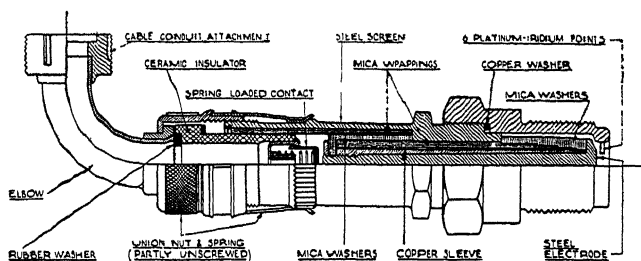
K.L.G. sparking plug as used on Bristol aircraft engines.
